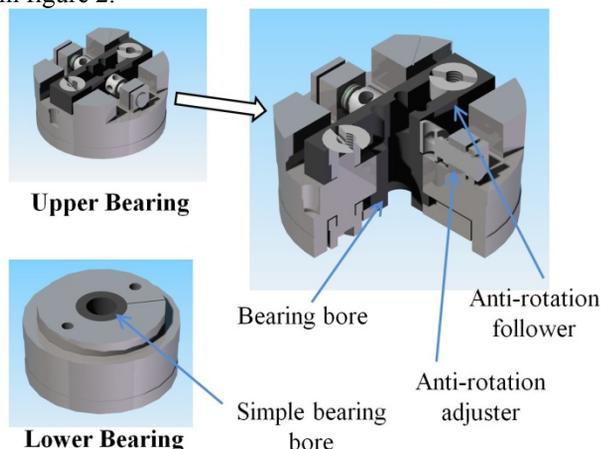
Upper and lower bearings, showing the VESPEL<sup>®</sup> inserts.
